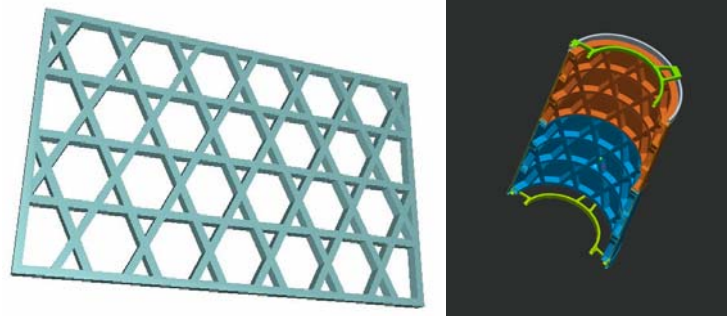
3D CAD drawing of flat and cylindrical anisogrid lattice structure
